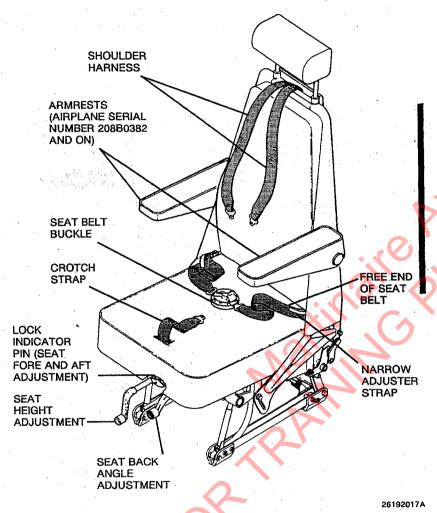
Seat Belts And Shoulder Harnesses (Sheet 1 of 2)
